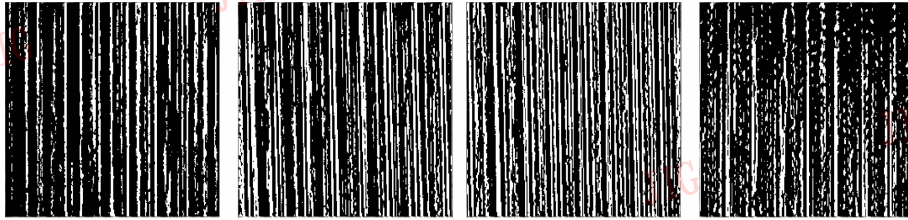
The workpiece images of the cutting tool from sharp state to dull state
